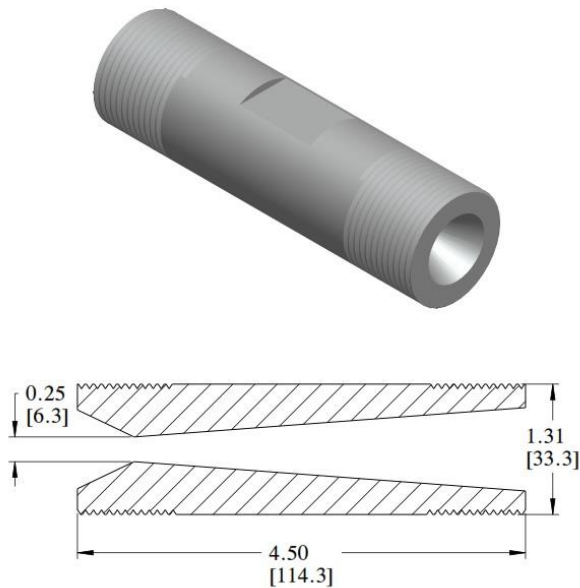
Schematic of the Sonic Nozzle with Cutaway View Showing Converging and Diverging Interior Sections
